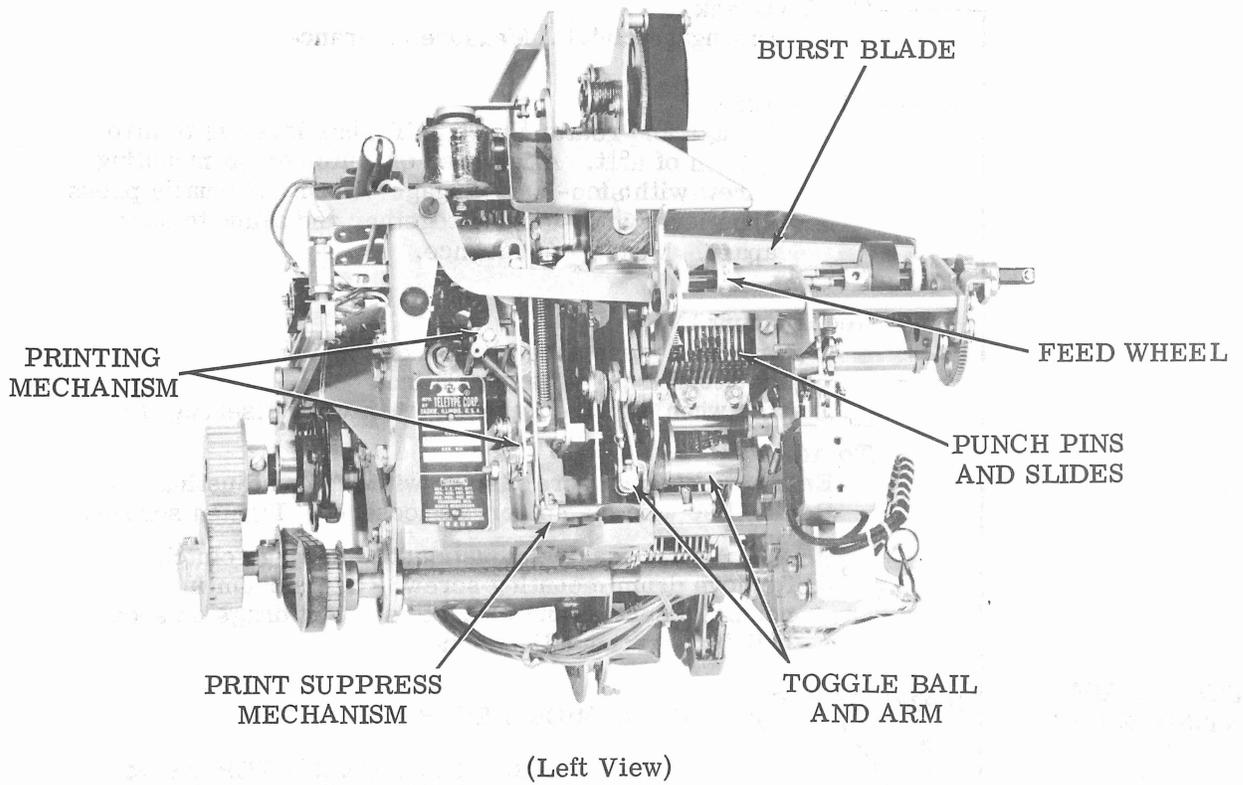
35 Edge Punched Card Typing Reperforator (Without Top Plates)
